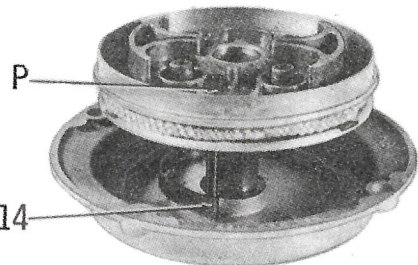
When reinstalling rope drum, use pin from pull handle (P) to guide end of rewind spring (14) into recess in drum.
